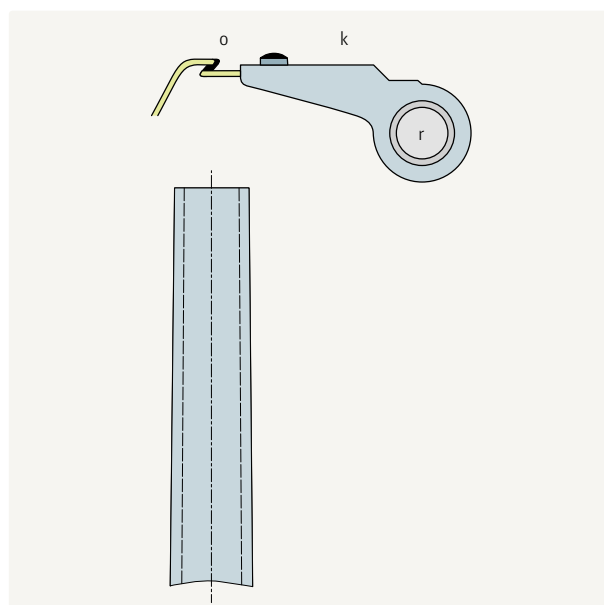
Thread board (k) and thread guide eyelet (o)
